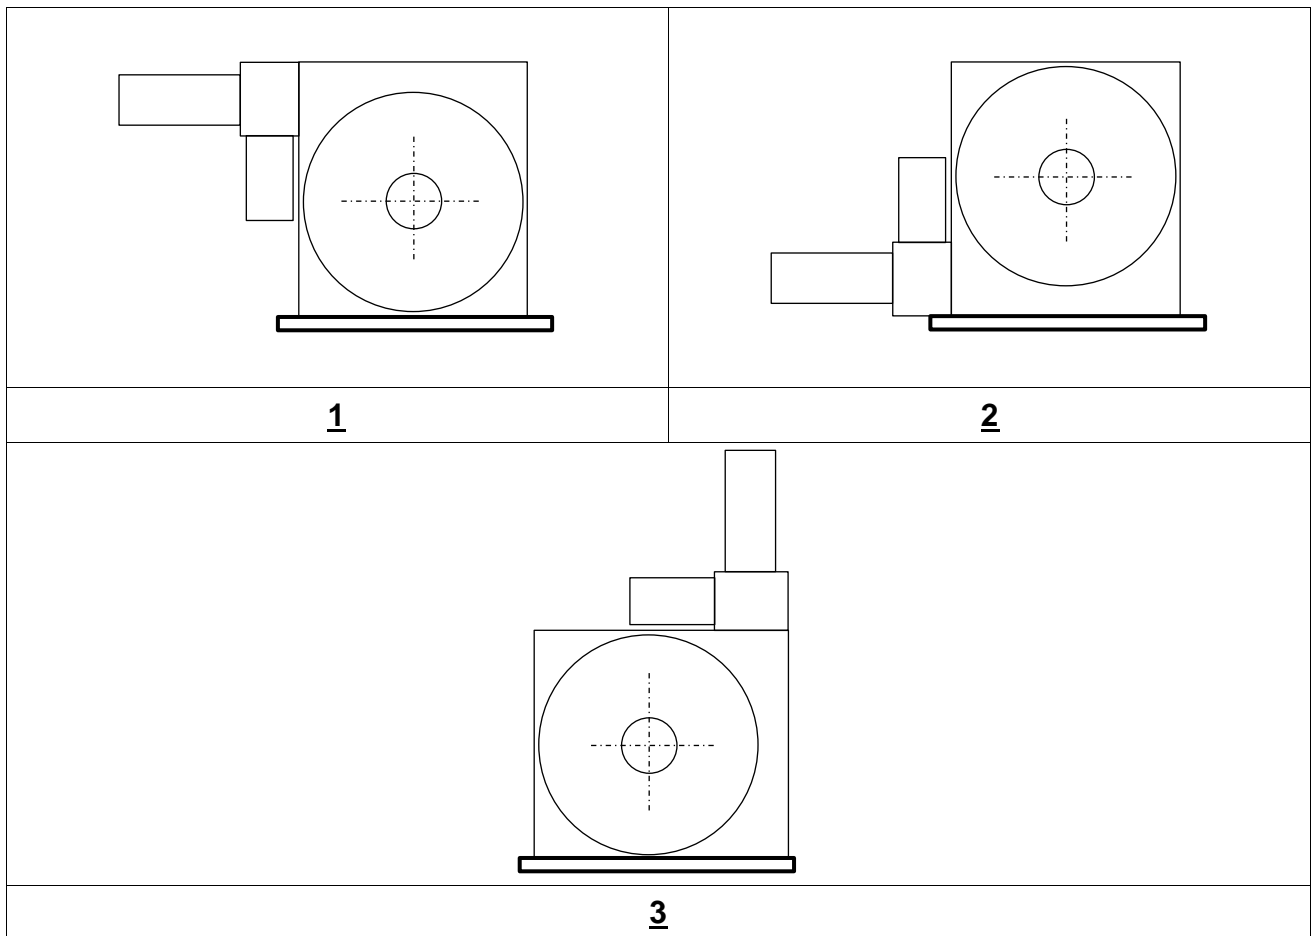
Bearing passive friction SIGUREN UNIT® with mounting plate
